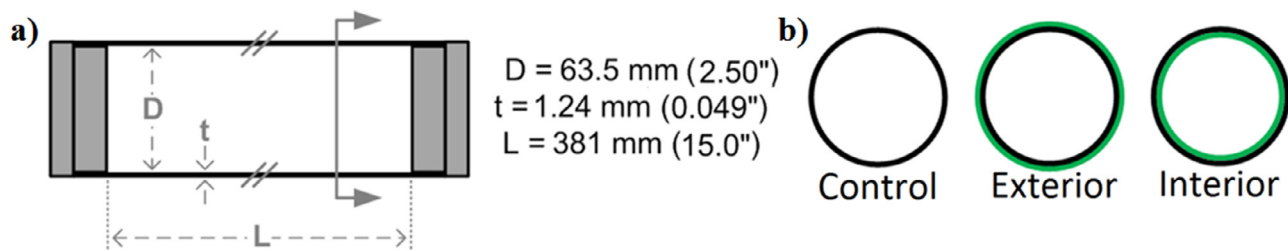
Specimen details; (a) tubular structure dimensions and (b) polyurea coating locations.
